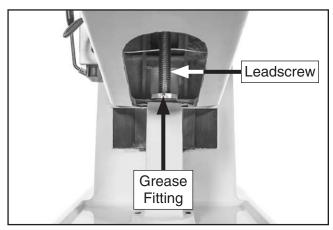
Elevation leadscrew grease fitting shown from front of machine.
